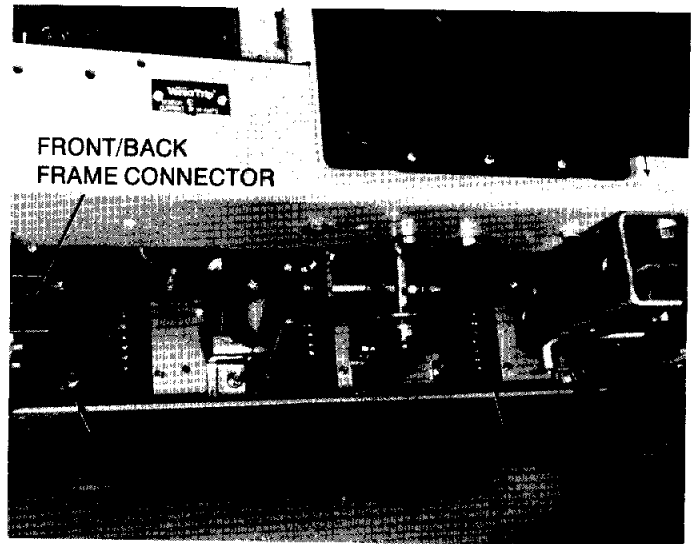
Back frame harness installation — AK/AKR-75/100
